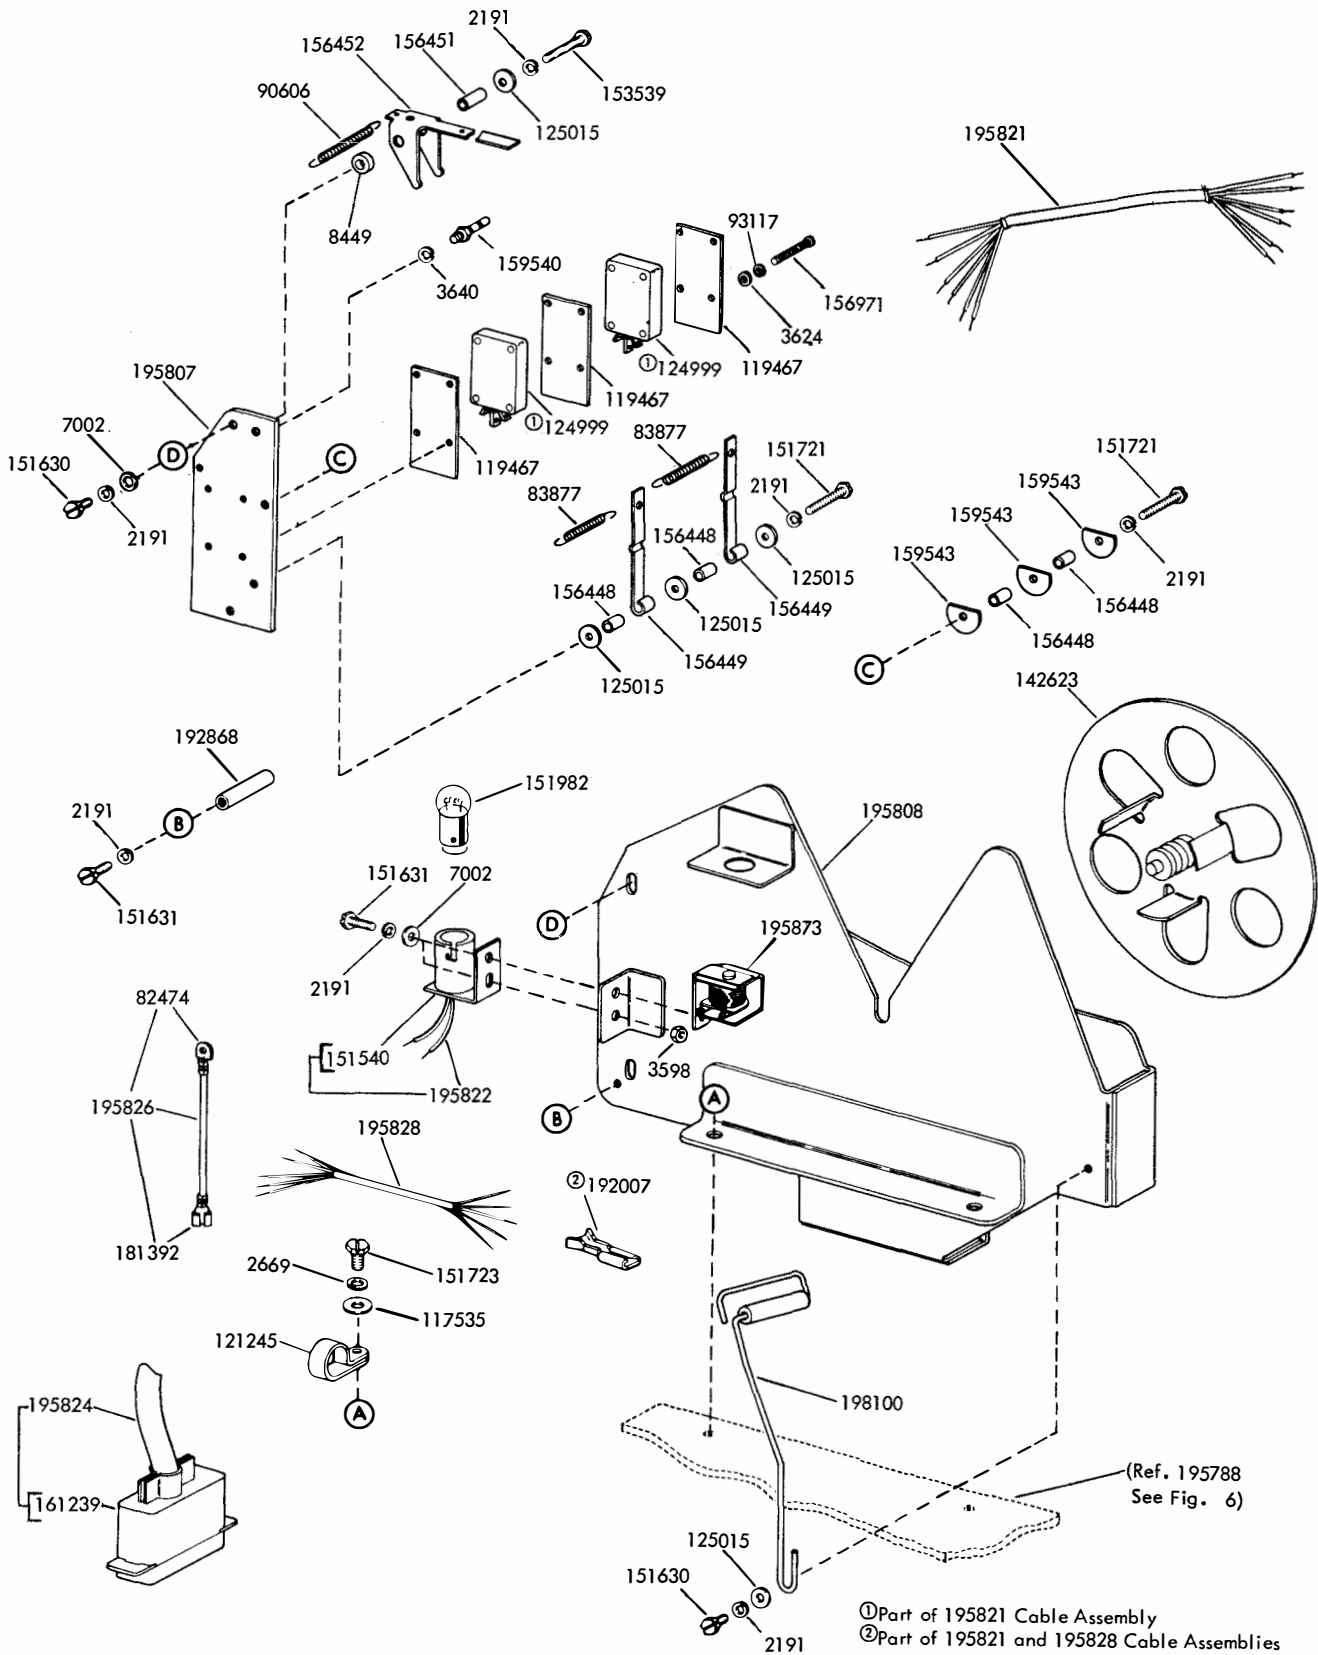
AUXILIARY TYPING REPERFORATOR TAPE CONTAINER
